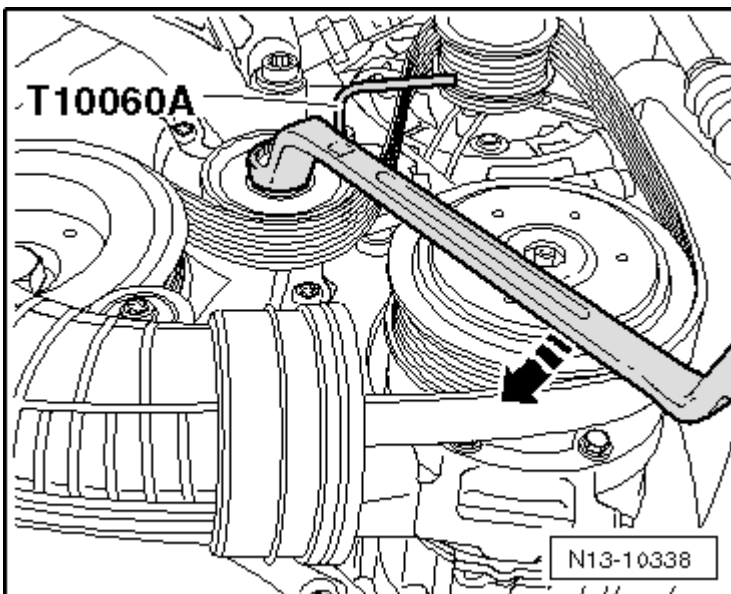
Identifying Wrench And Locking Pin -T10060 A-
